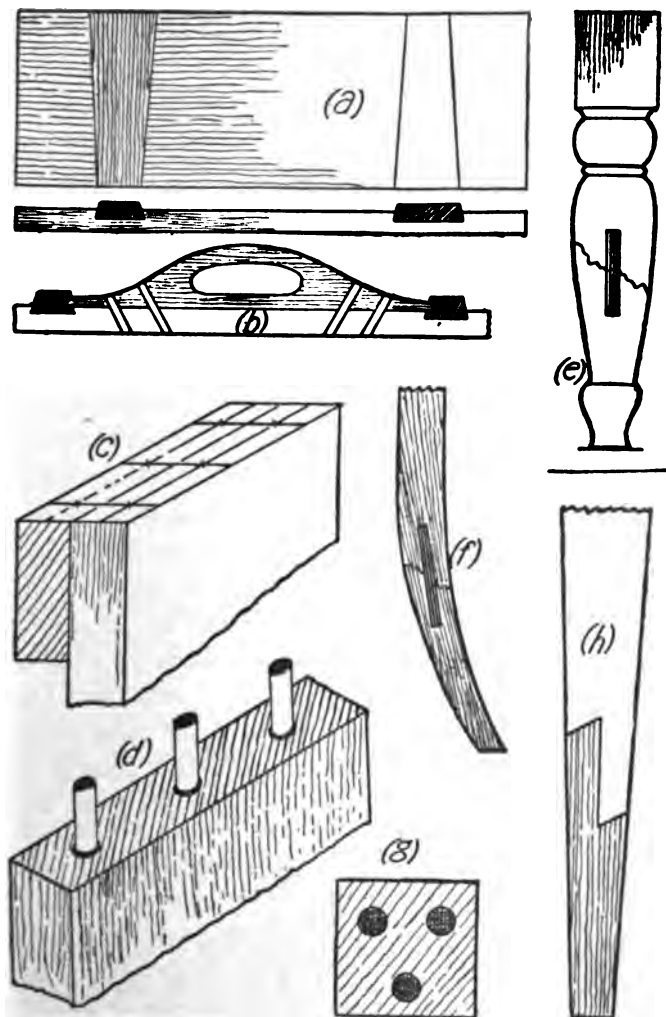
(a) Keyed clamp; (b) copper lid handle; (c) marking pieces for dowel holes; (d) dowels in position; (e, f, g, h) repairs to furniture.
